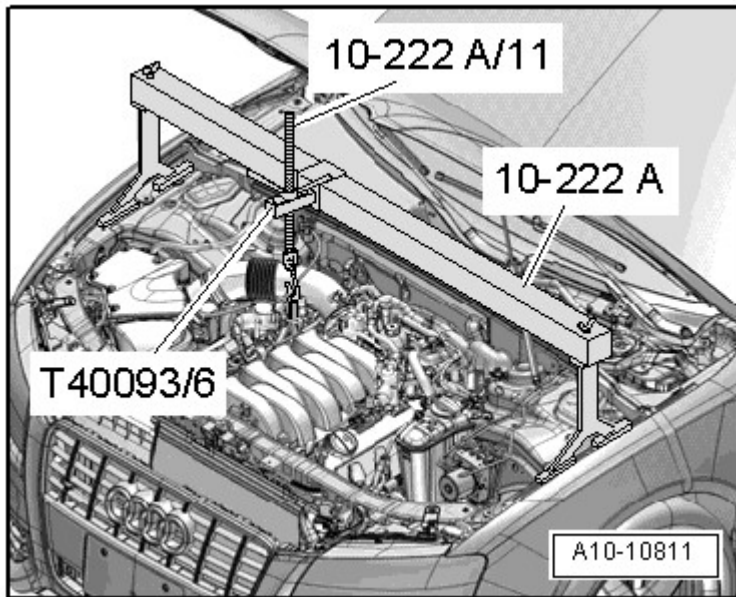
Installing 10 - 222 A With T40093/6 On Left And Right Strut Towers
